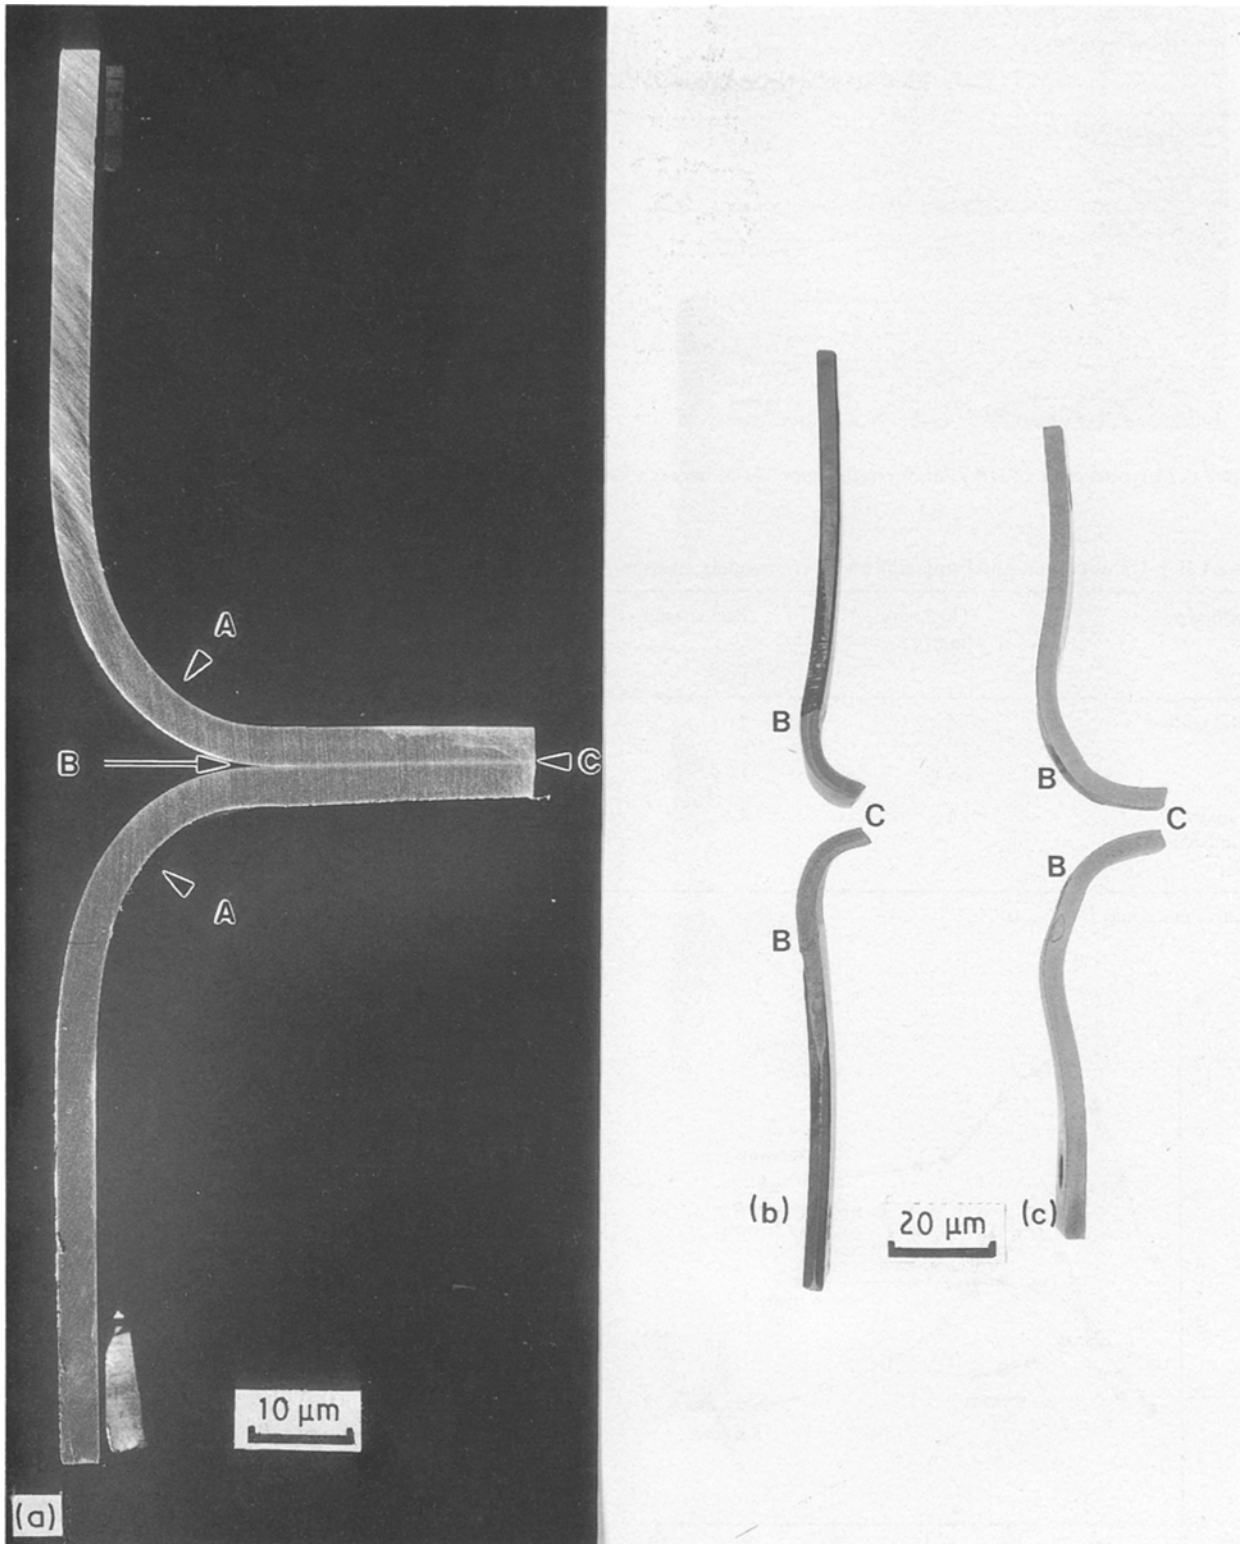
Diffusion-bonded 4 mm thick 8090 alloy 90° "T" peel test piece with large bend radius at A: (a) before testing. Solid state DB (b) and TLPDB (c) after peel fracture under superplastic conditions at 530 °C. Crack initiation at B, peel fracture B-C.
